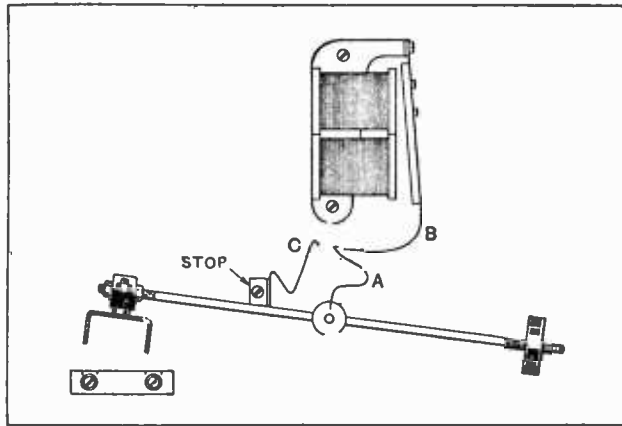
Complete assembly ("off" position) with retaining spring (C) and operating panel (B).
